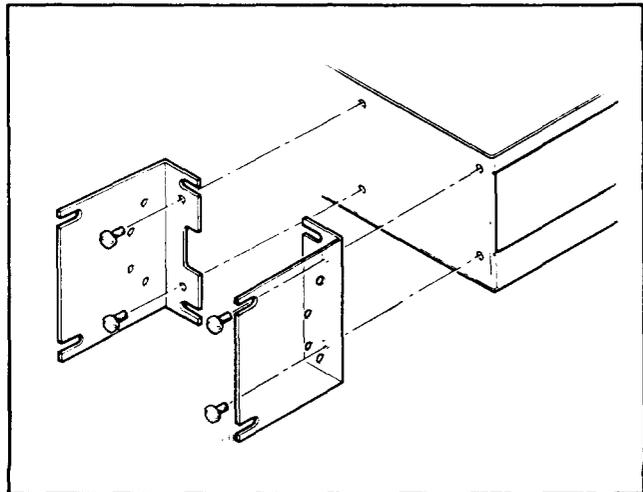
Bracket Attachment 23 in. Rack Mounting
